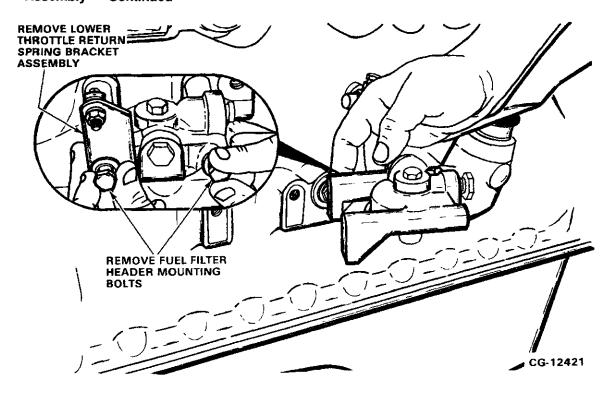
Remove Fuel Filter Header and Lower Throttle Return Spring Bracket Assembly
